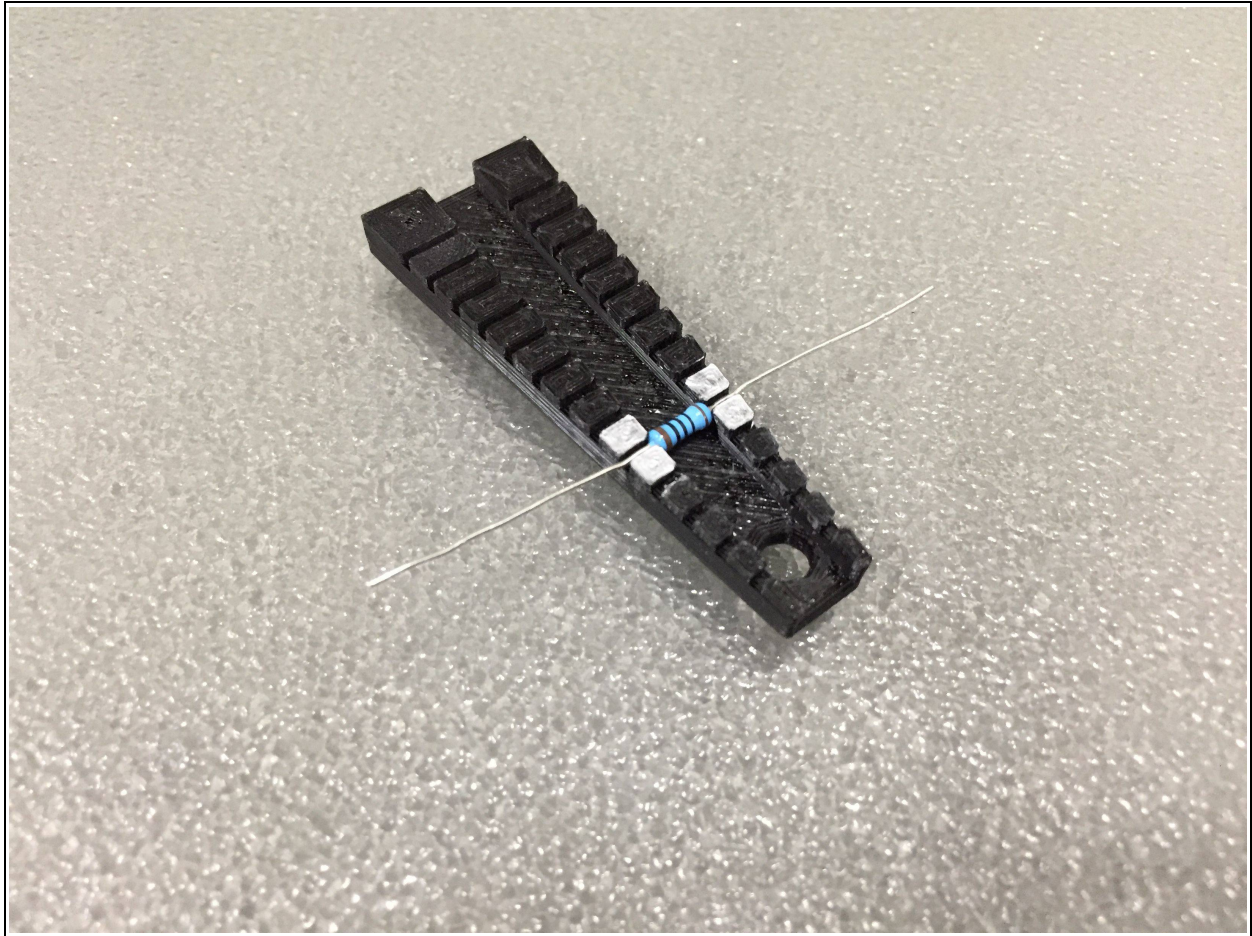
Resistor inserted into bend tool (0.5" bend)
